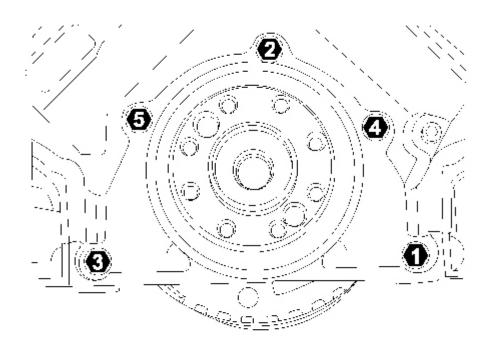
Front Cover Slide Bushings Courtesy of CHRYSLER LLC
